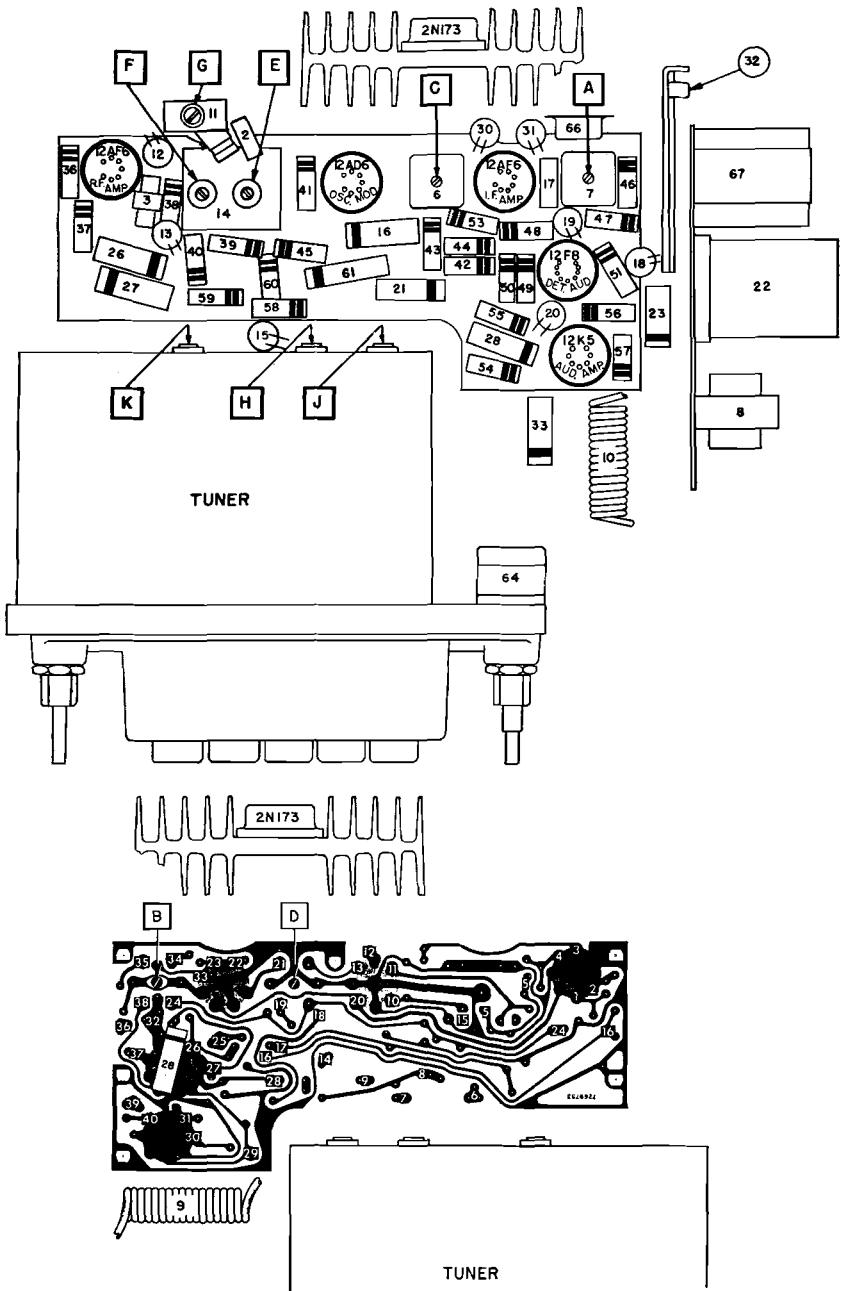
Parts layout diagrams of the Model 987575 receiver. A view from the "tube side" is given at (a), a below chassis view at (b).
